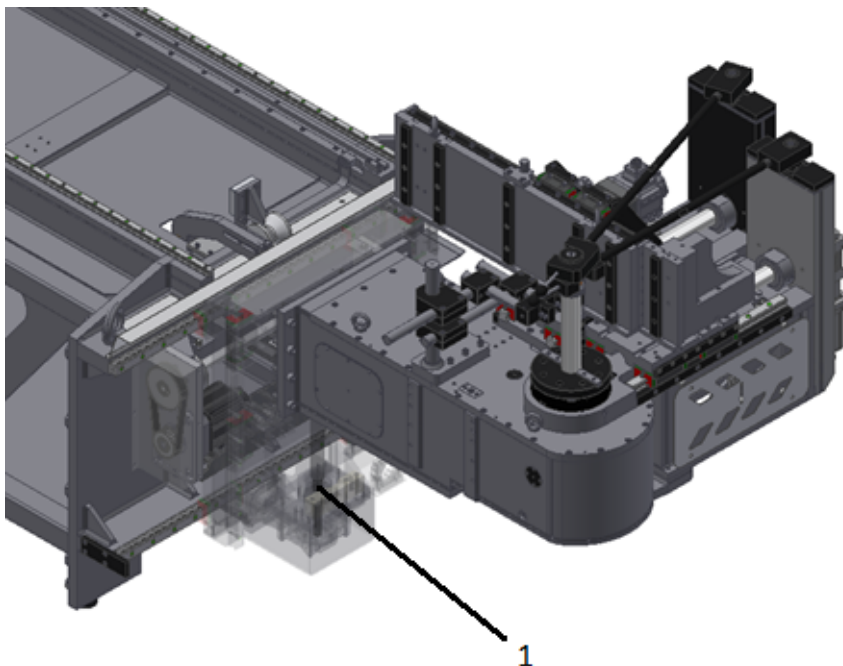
Bending head carriage with H axis ball-recirculating screw marked as 1 (AMOB, a)
